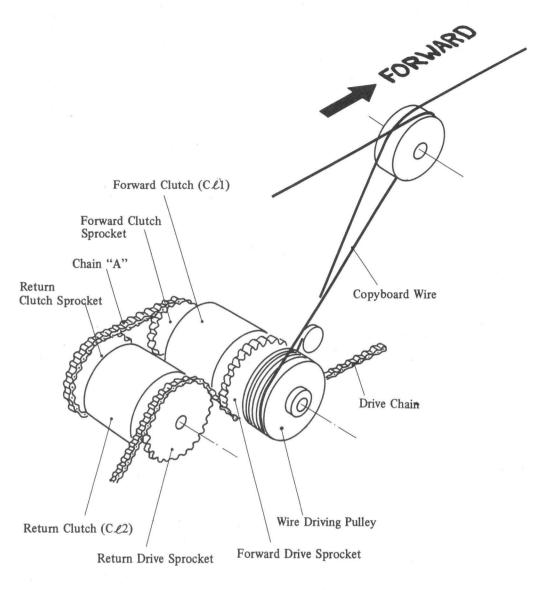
Copyboard Driving Mechanism Assembly Main Components
